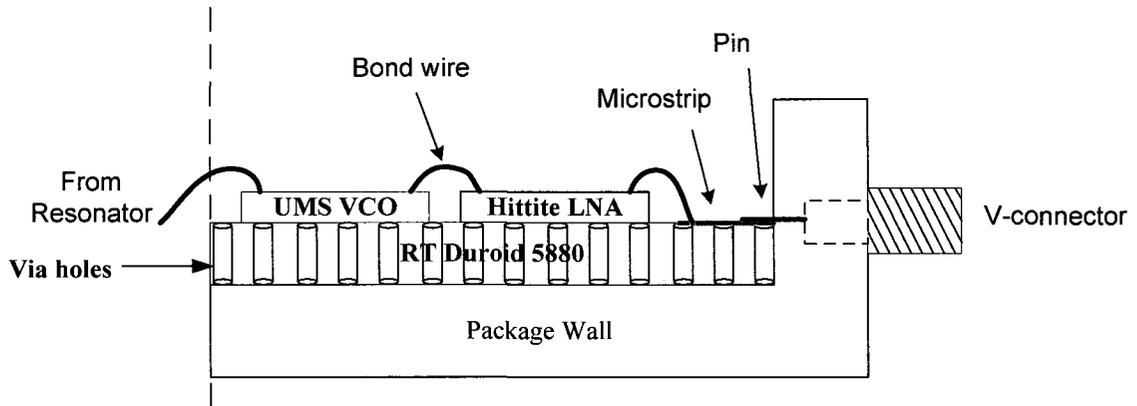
RT Duroid PCB design using via holes with active chips on top
